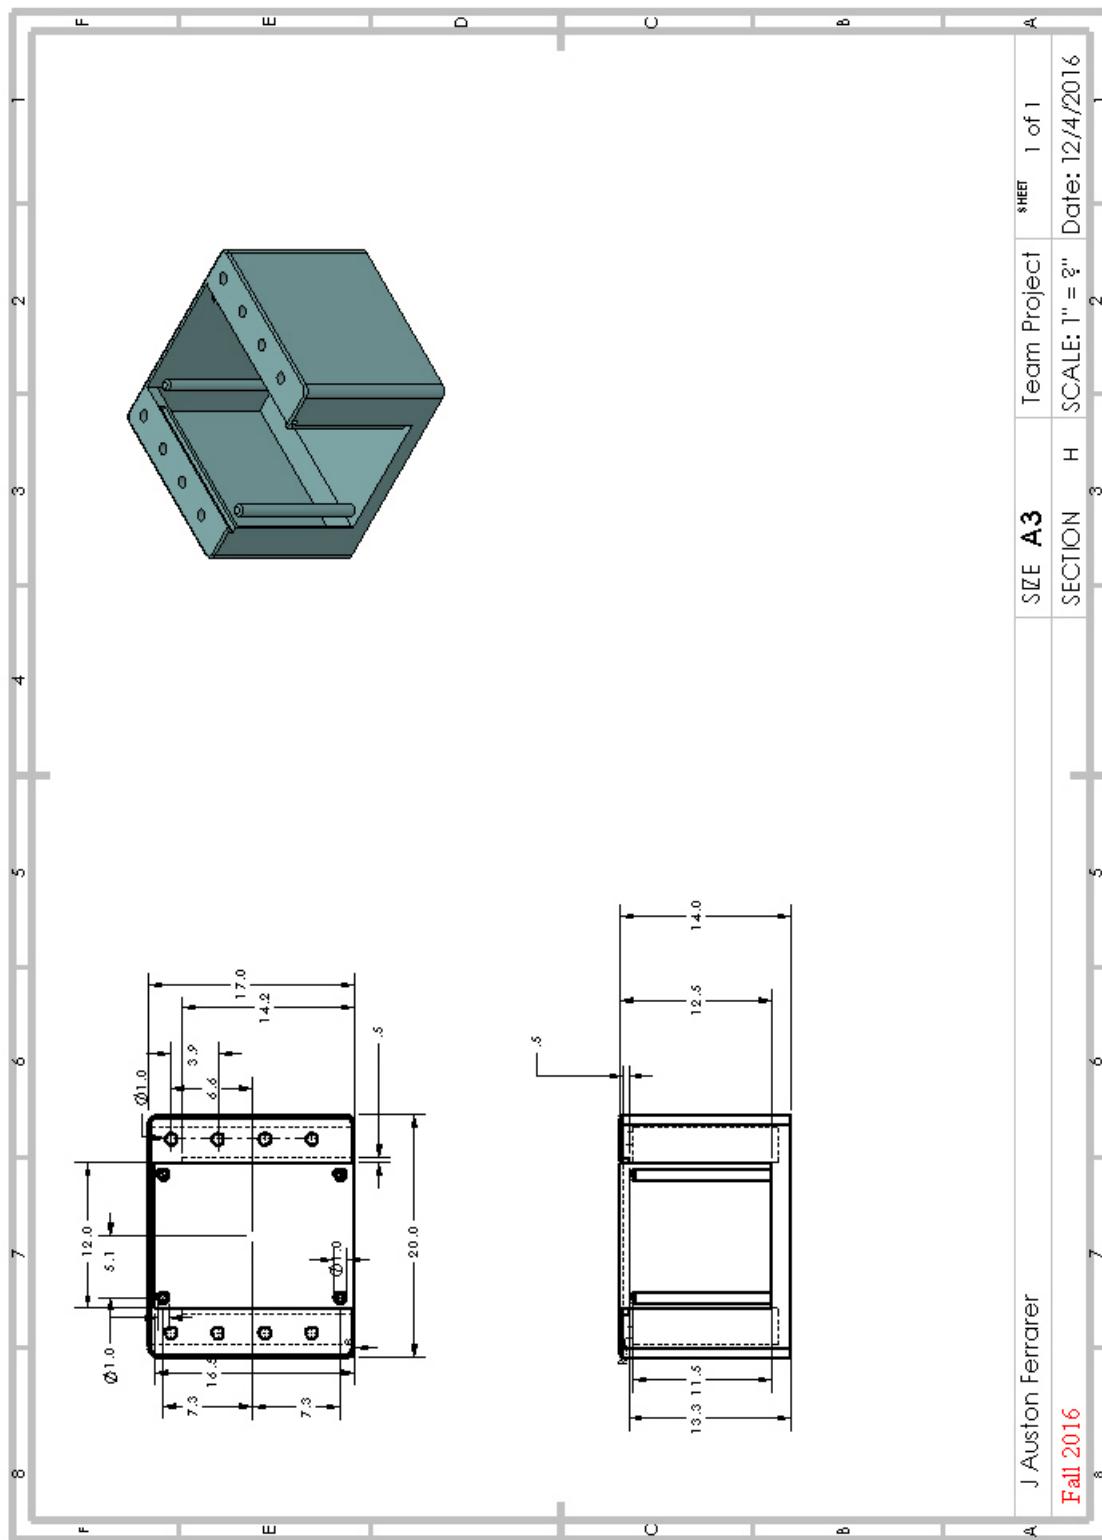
Ferrarer, Auston: Base Extrusion
